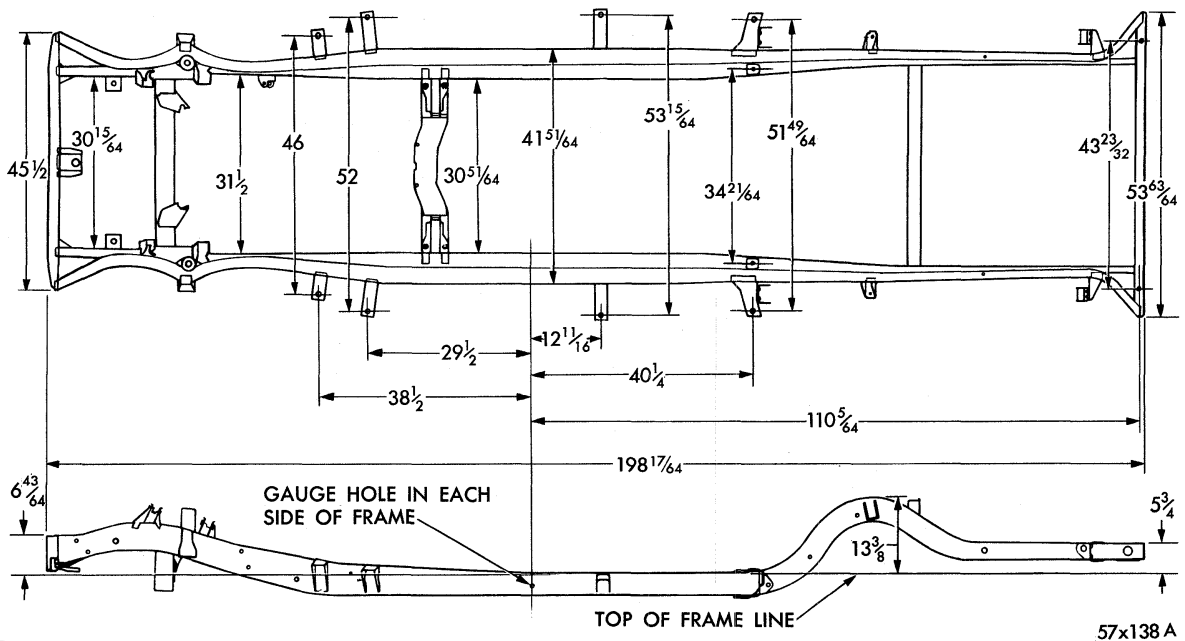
Frame Dimensions Saratoga and New Yorker
